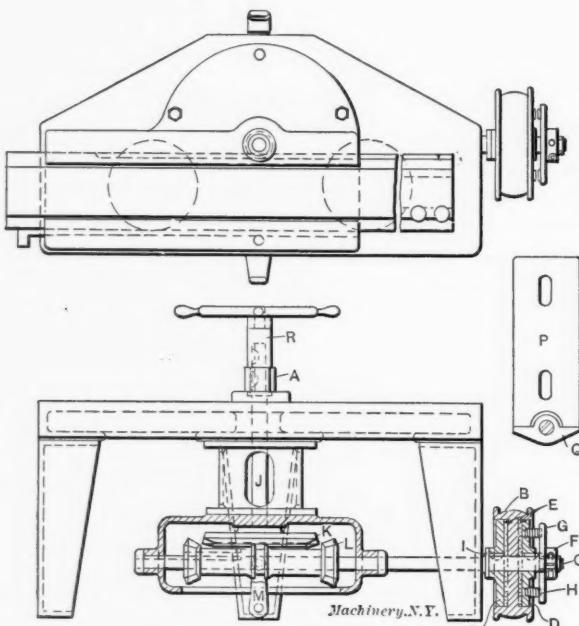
Machine for Imparting Motion to Boring Mill Rams while Scraping.
